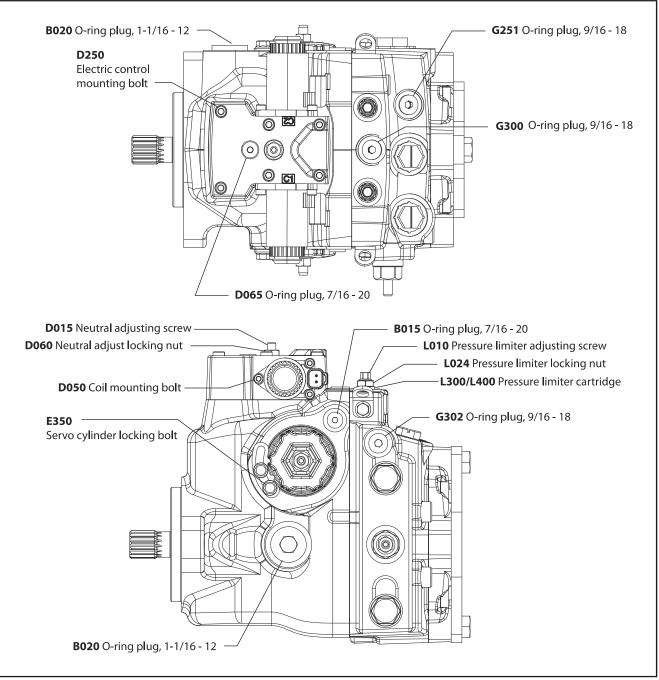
Fasteners and Plugs - Sheet 2 of 2
